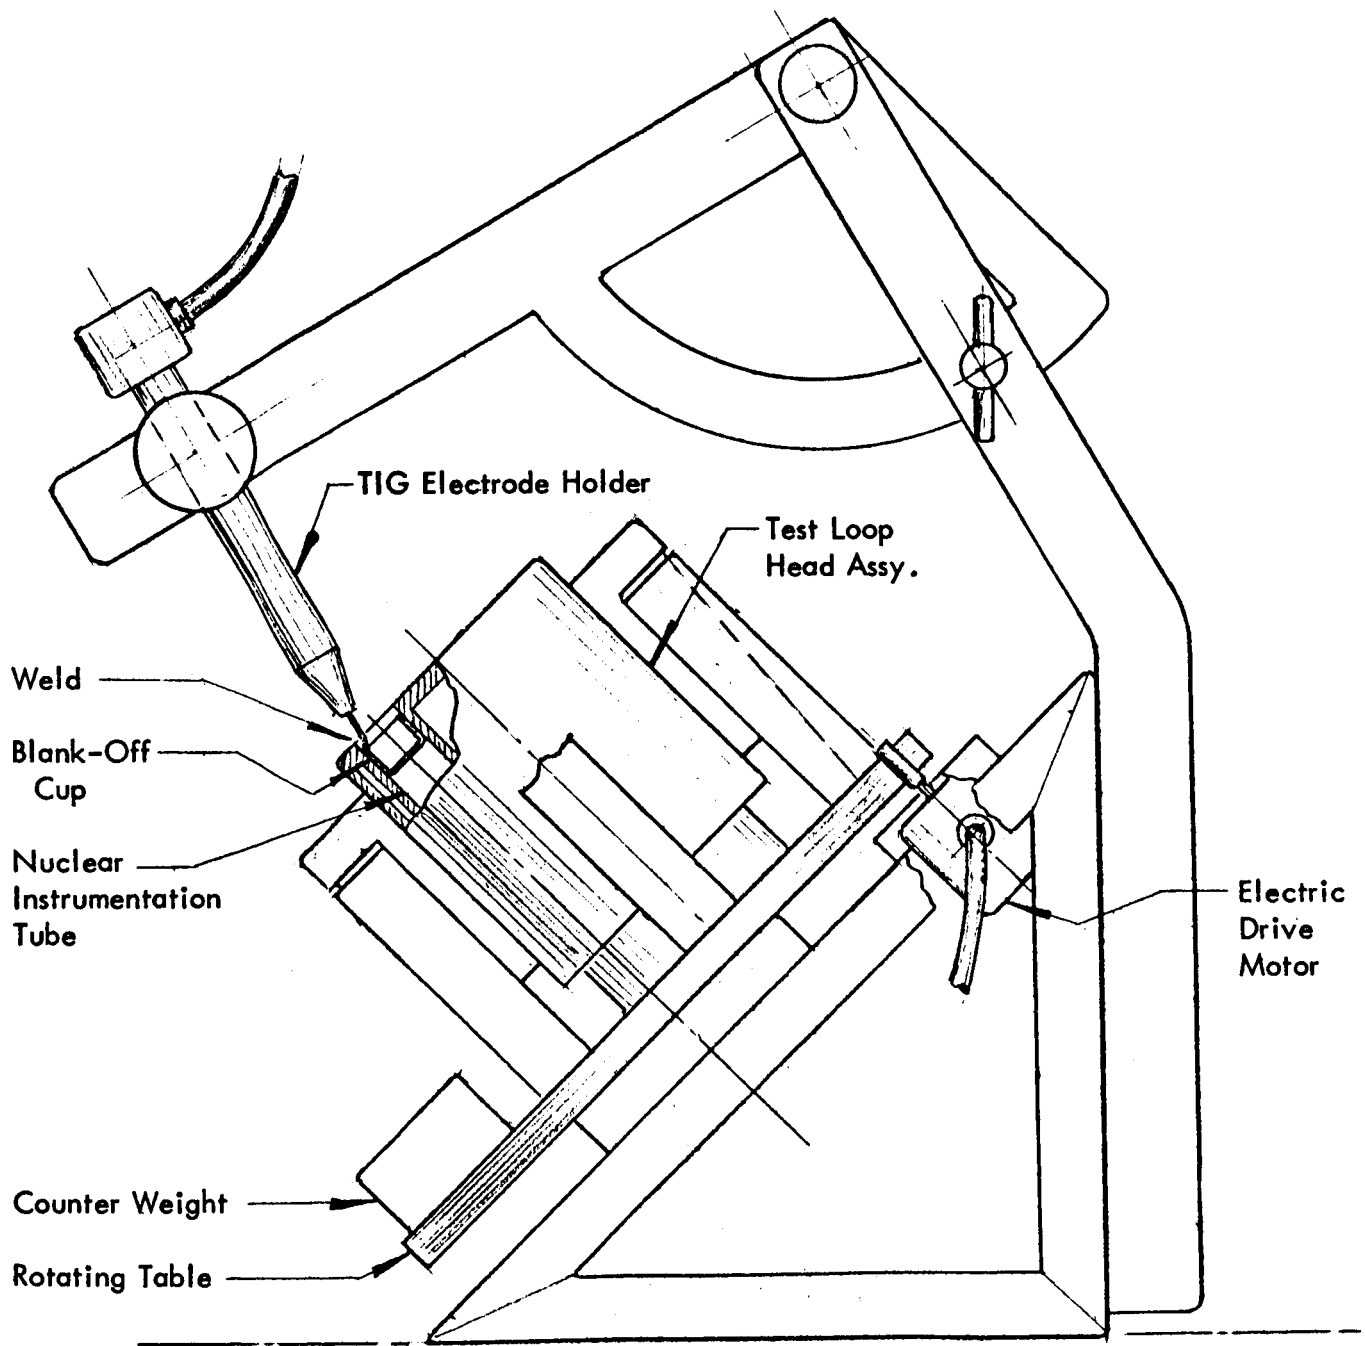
WELDING FIXTURE FOR WELDING THE BLANK-OFF CUP INTO THE NUCLEAR INSTRUMENTATION TUBE
